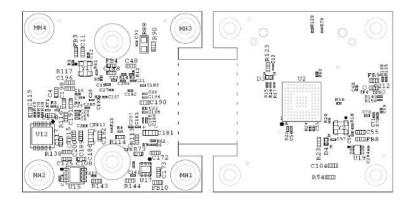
Rear View of e-CAM81\_CUONX Module Board Mechanical Dimensions
